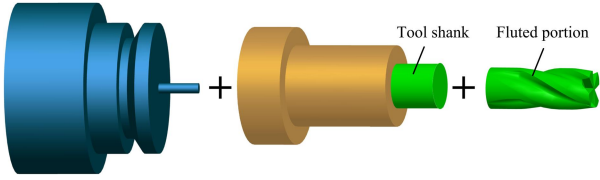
Receptance coupling model of machine-spindle-holder-tool
